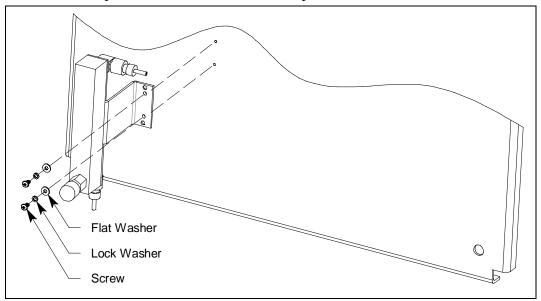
Attaching the H₂S Dilution Sample Flowmeter Bracket to Plate
